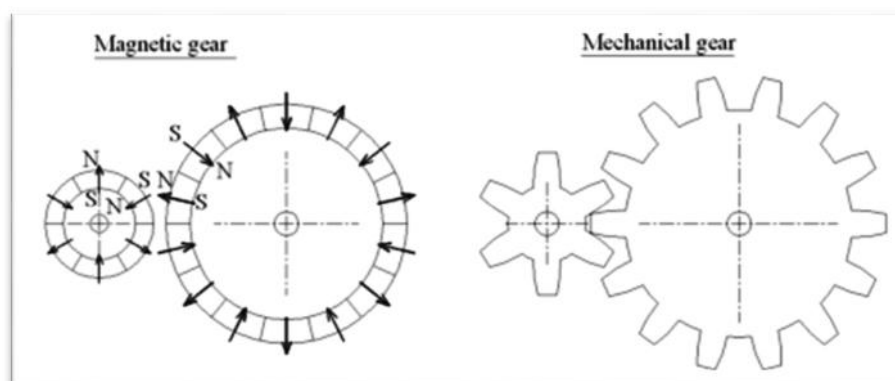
Contactless gear (Magnetic Gear) and Mechanical gear [1]
